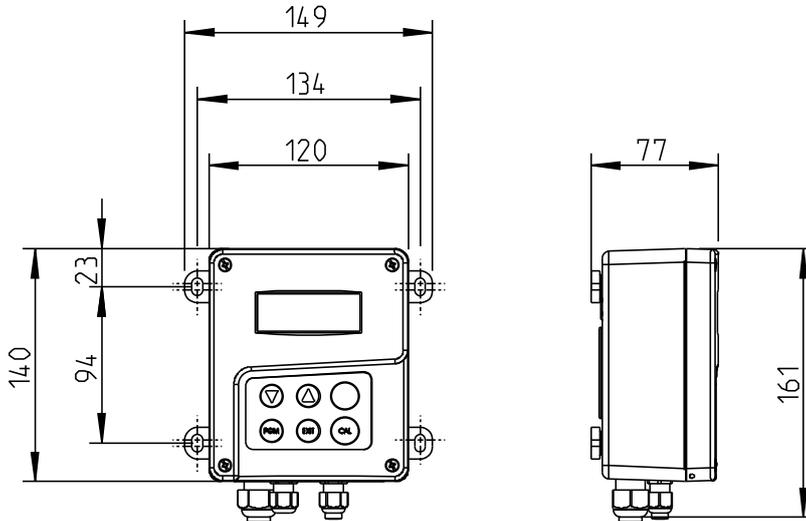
Dimensional drawing - pH/redox measuring transducer
